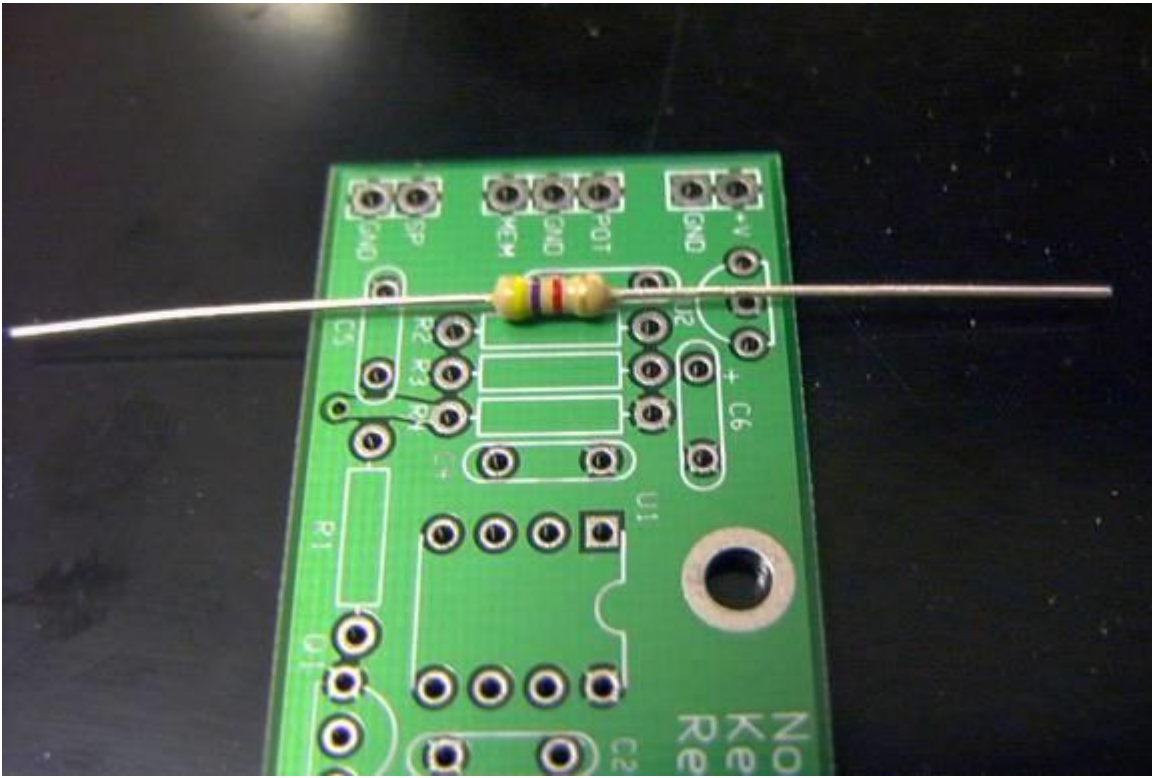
Resistor shown laying on board with 0.4" hole spacing.
